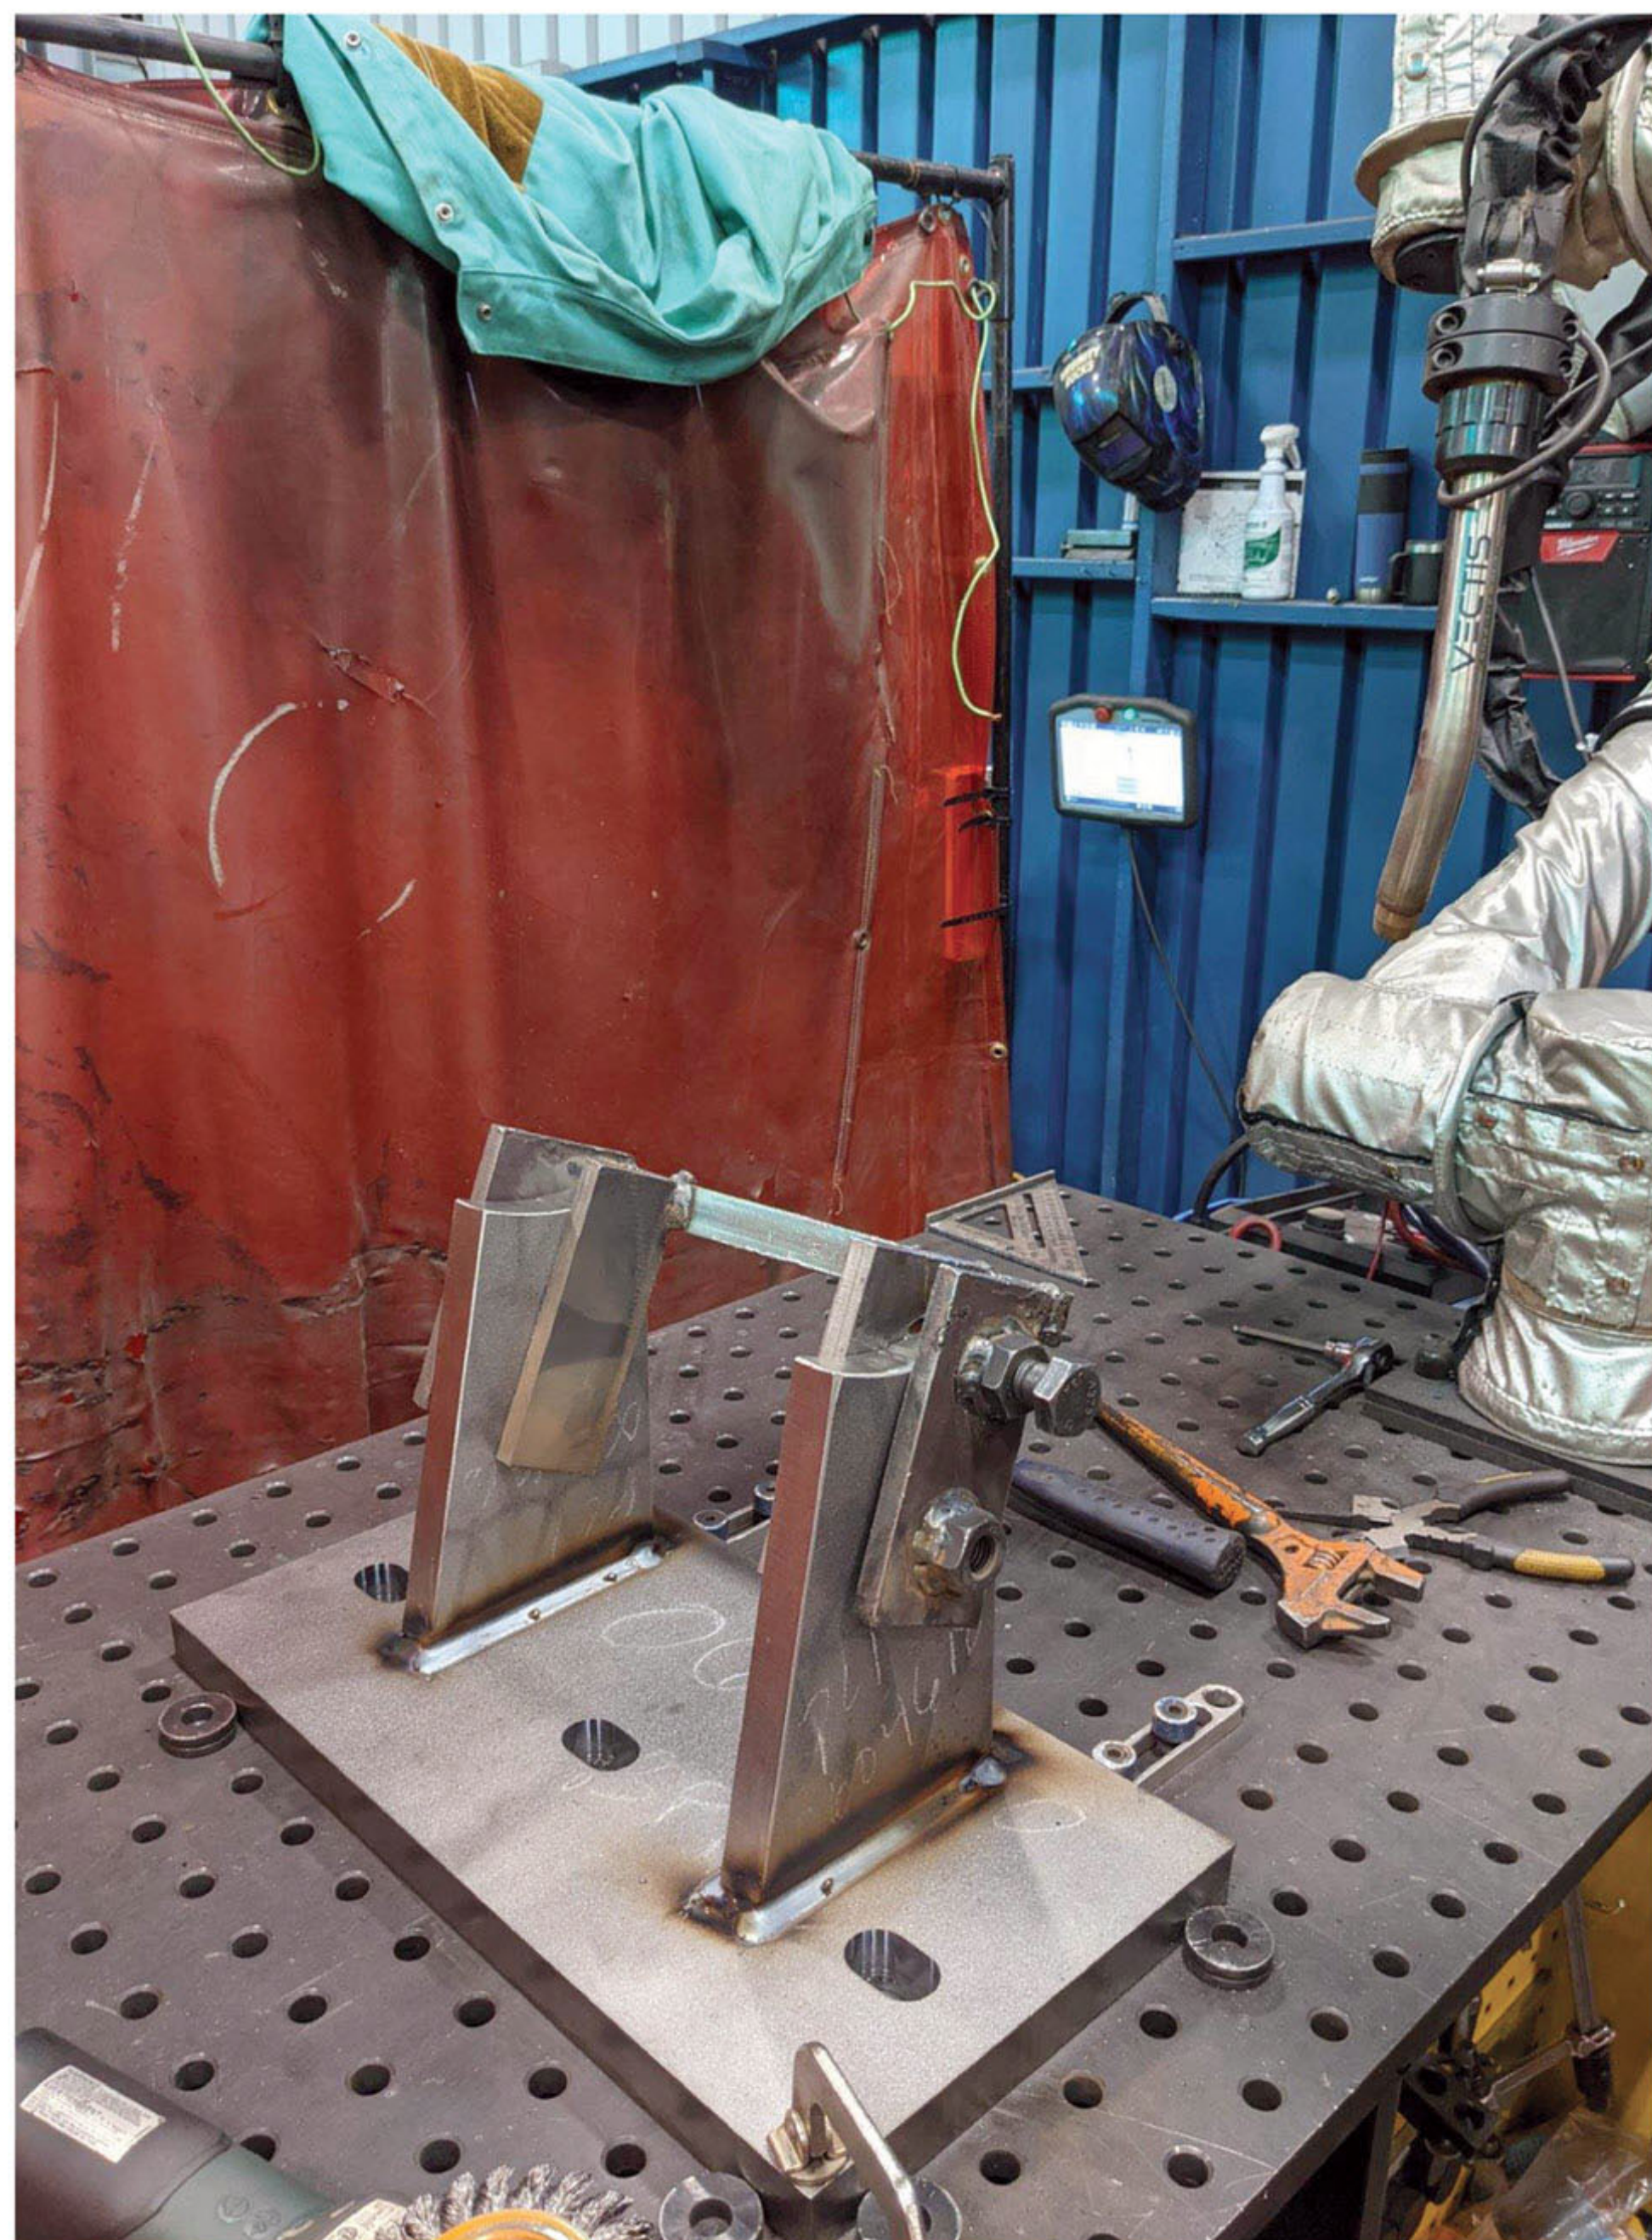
The Vectis Cobot Welding Tool finishes the first pass of a multipass weld.
